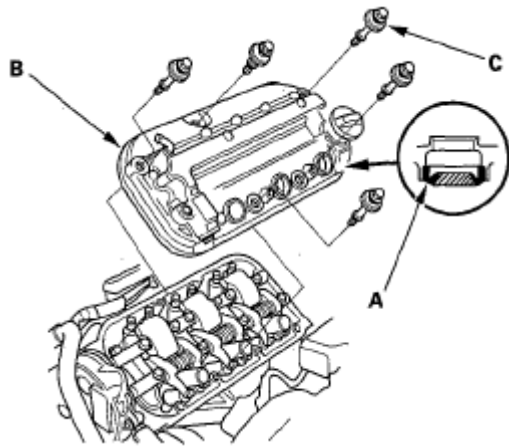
Identifying Cylinder Head Cover And Spark Plug Seals - Front
